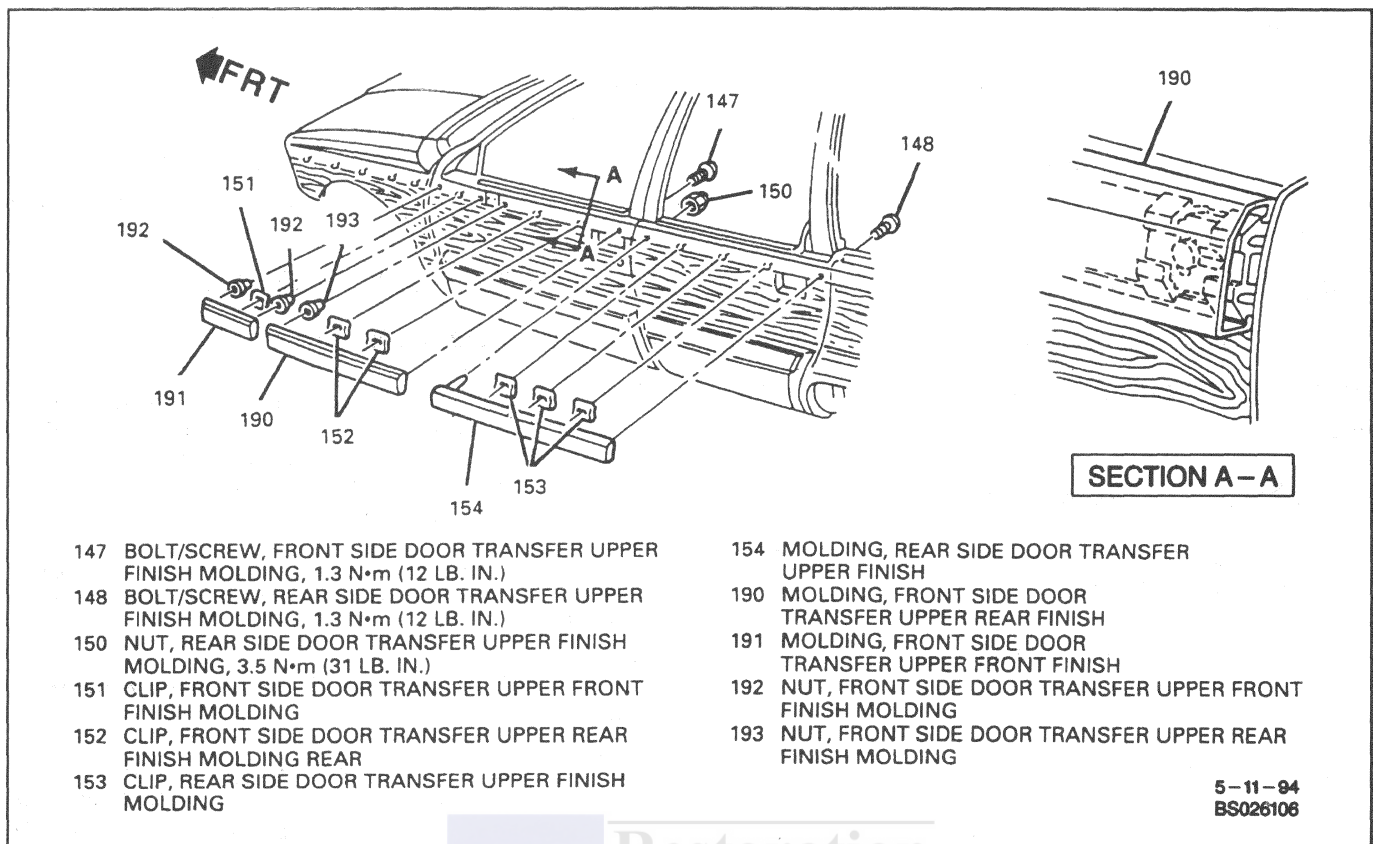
Wood Grain Side Door Transfer Upper Finish Molding-(Wagon)
